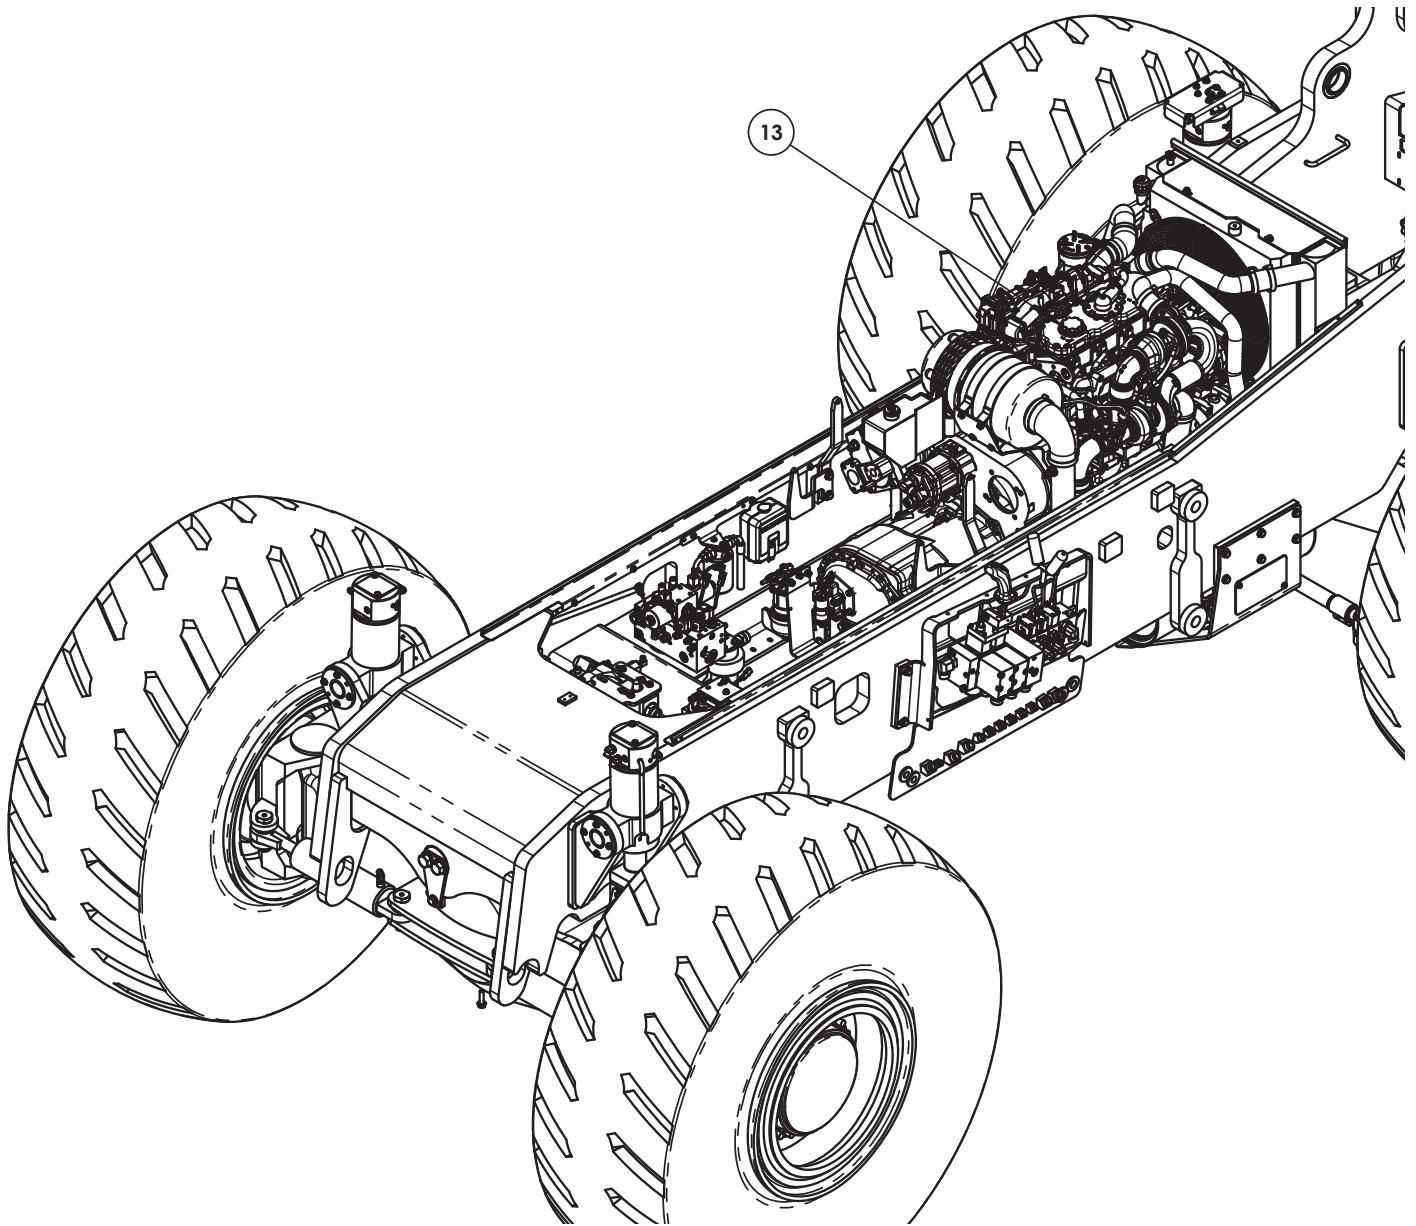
CHASSIS ASSEMBLY - ENGINE (32003-000)
